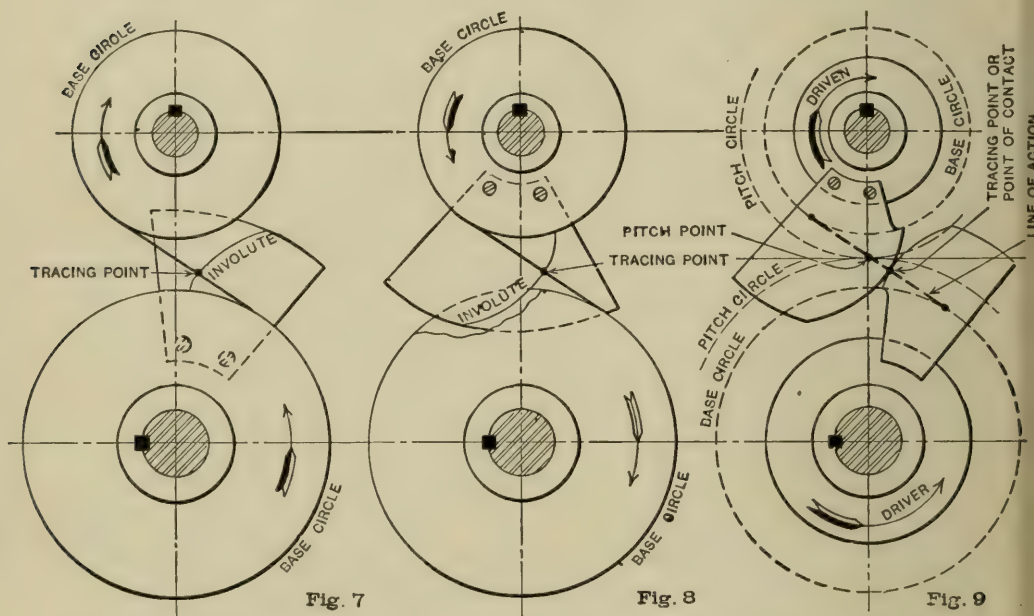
Drawing an Involute on a Card attached to the Lower One of a Pair of Disks connected by a Taut Thread, FIG. 8. — Drawing the Involute on a Card attached to the Upper Disk. FIG. 9. — The Two Cards cut out to form Involute Templets and used to transmit Uniform Motion from the Lower to the Upper Shaft.
